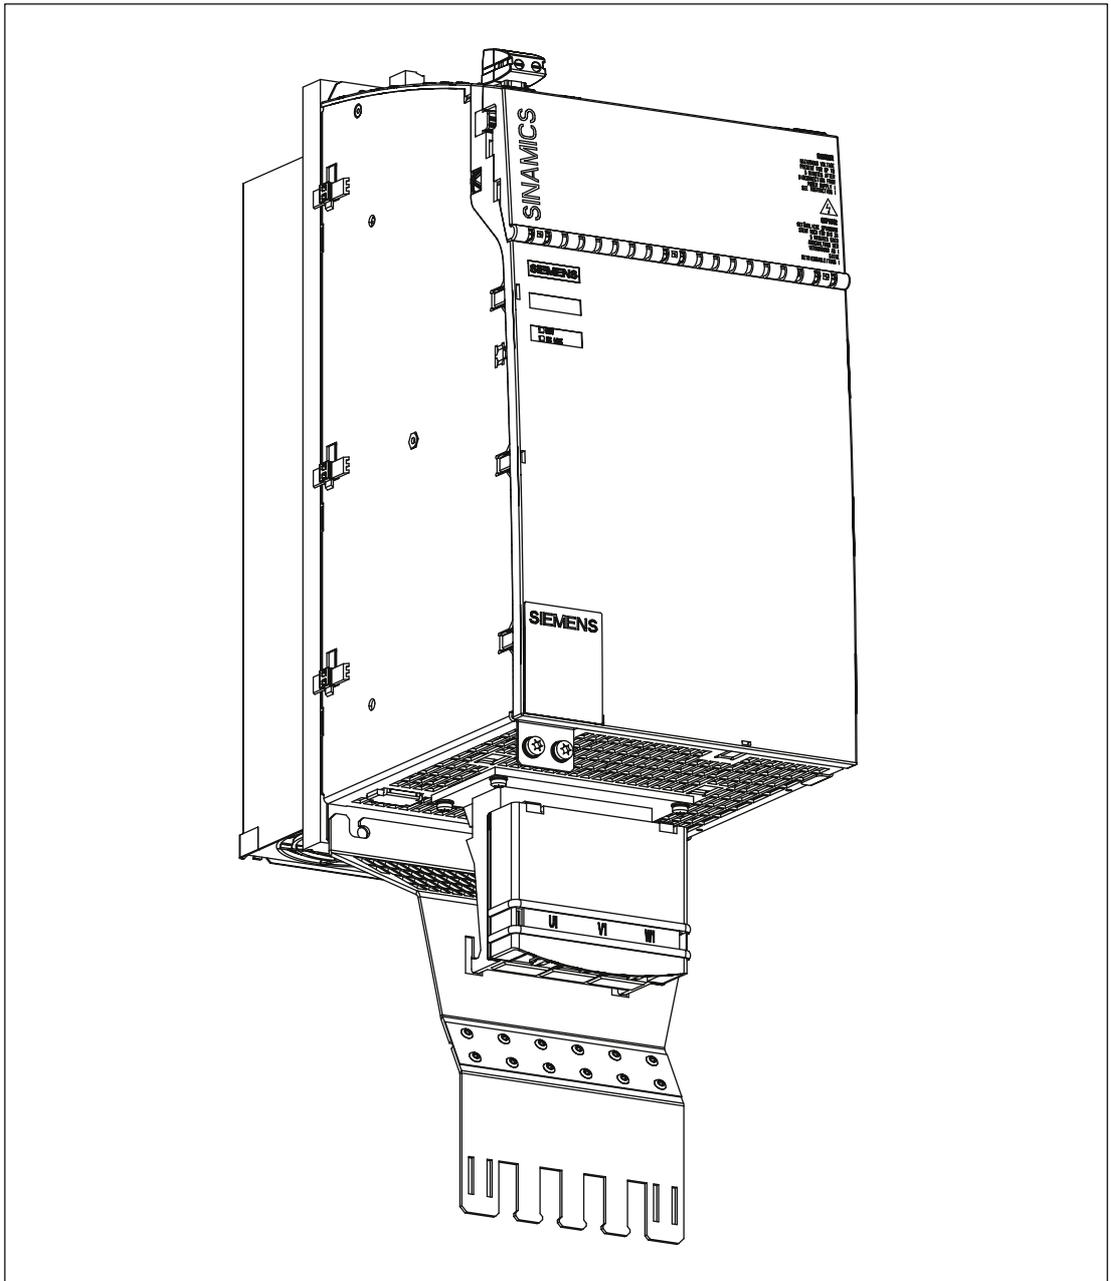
Shield connecting plate for a 200 mm module with external air cooling
